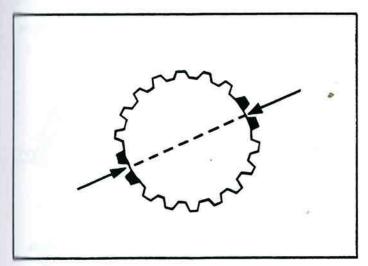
Main Drive Gear Teeth Correctly Marked For Timing.
